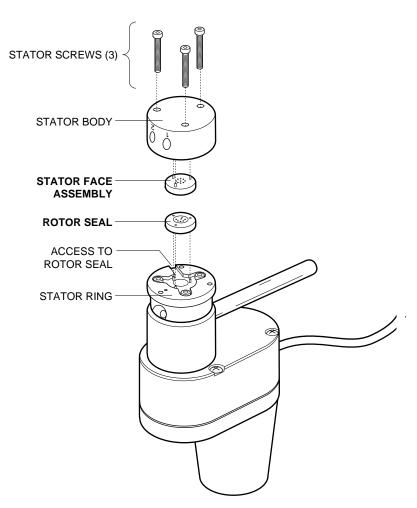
AVR7-3 and AVR9-8 Valve Assembly
